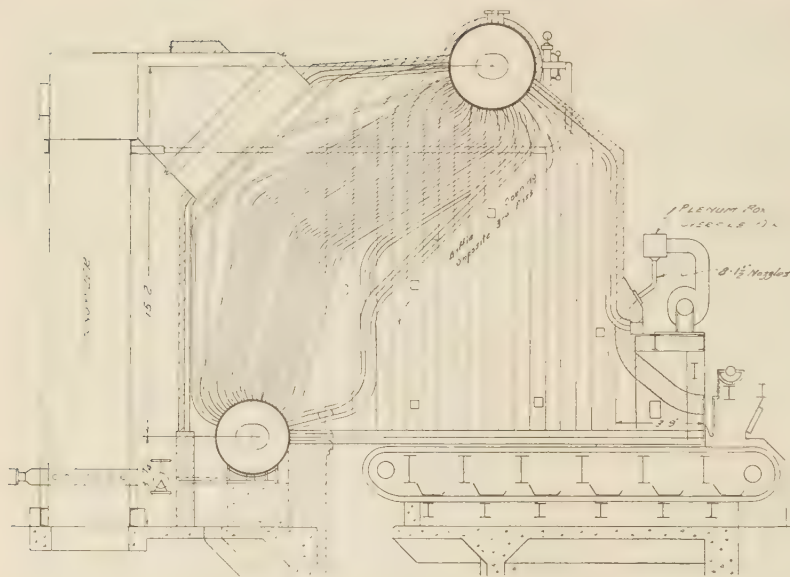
BABCOCK & WILCOX INTEGRAL-FURNACE BOILER, 35,000-LB PER HR STEAM CAPACITY, EQUIPPED WITH CHAIN-GRATE STOKER
